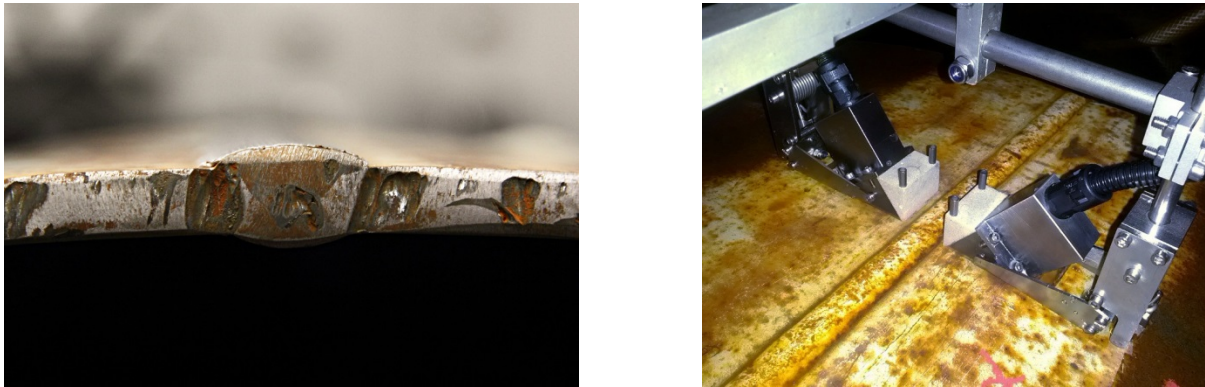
Cross-sectional view of the weld (left); measurement setup (right)
